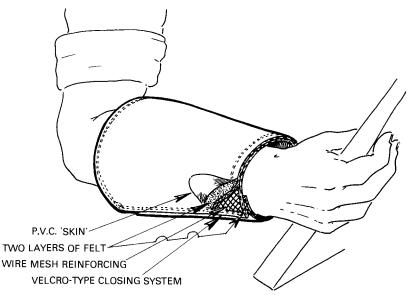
Flexible protective reinforced armlet for handling sheet metal.
